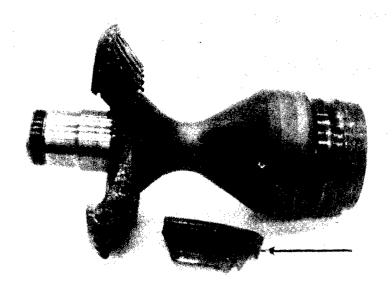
Optical Macrograph of the failed spiral bevel gear and the fractured eight-tooth segment (denoted by the arrow). Reduced 70%.
